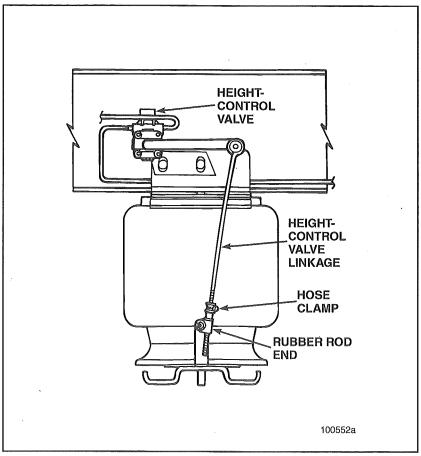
Height-Control Valve Linkage with Rubber Rod Ends (Except AL-405)
